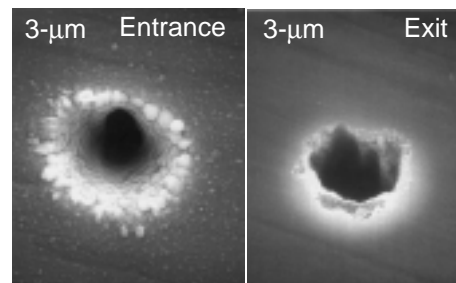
Laser-drilled hole through 125- μm -thick Be foil.
